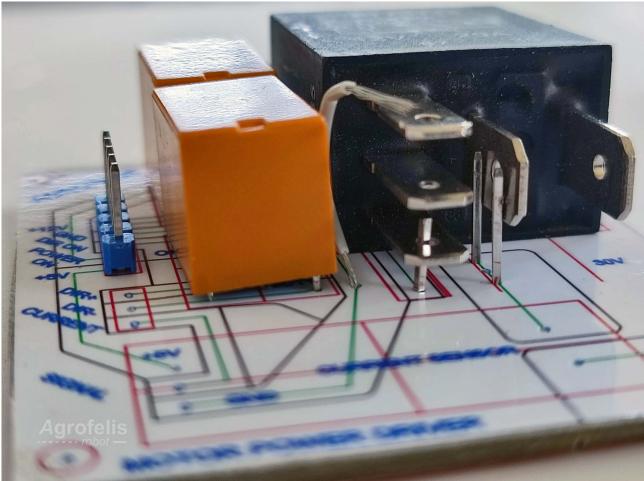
Close up of the pins and wire used to mount the 20 amp Relay on the PCB
